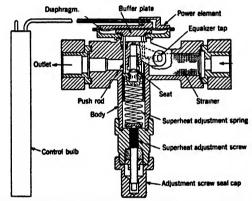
TYPICAL THERMOSTATIC EXPANSION VALVE
